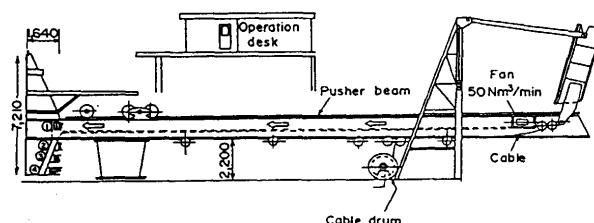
Carbon removing equipment installed on an actual pusher beam
